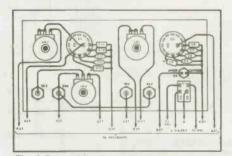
Rear of front panel wiring and details of wiring to the circuit board and power supply transformer.
